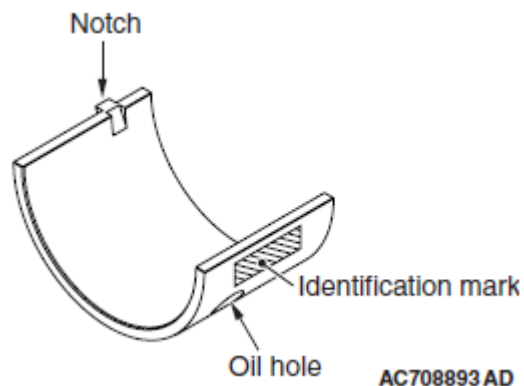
Identifying Front Camshaft Bearing Identification Mark And Oil Hole
